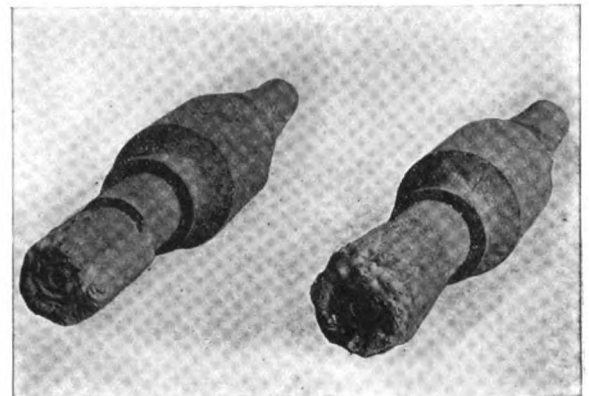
Steel parts incorrectly machined built up by the arc welder and afterwards re-machined to proper size.
